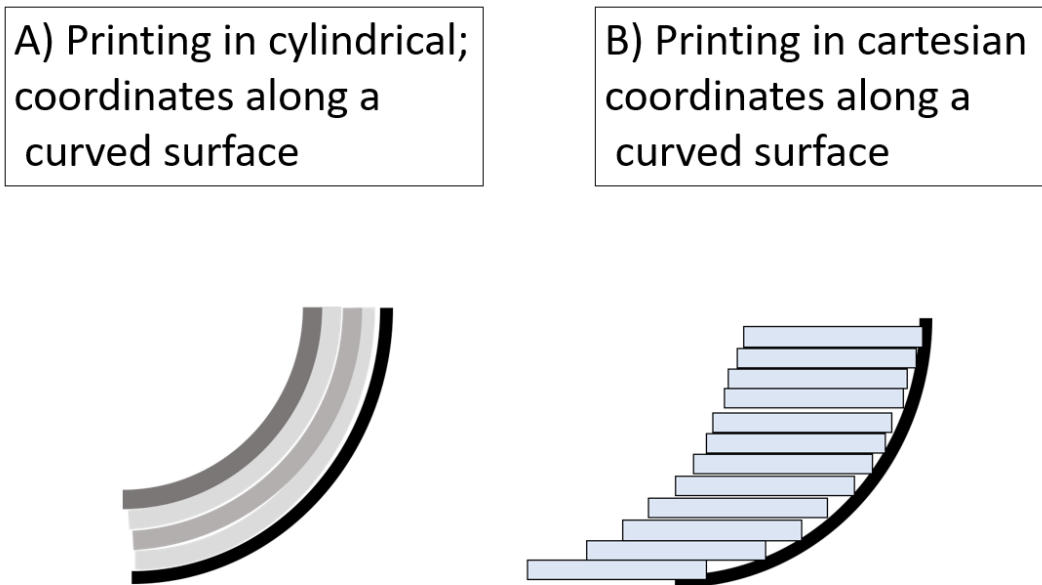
Schematic showing the deposition of the 3D printing ink in A) A curvilinear printer, B) A cartesian coordinates printer. Note the step like surface formed.
